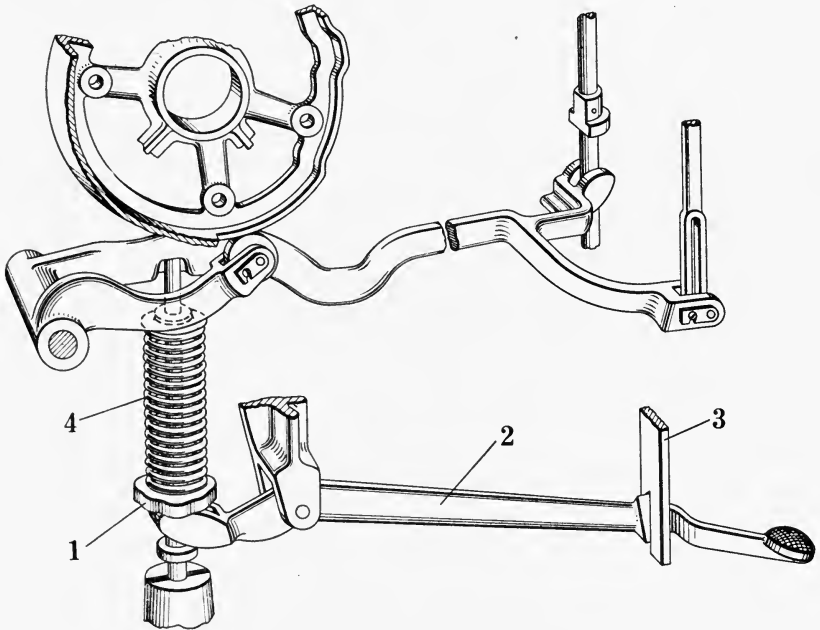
Vise Jaw Closing Spring Operating Lever. This device is employed on the forty-two-em machine when casting from matrix lines containing twenty-five or more spacebands.
